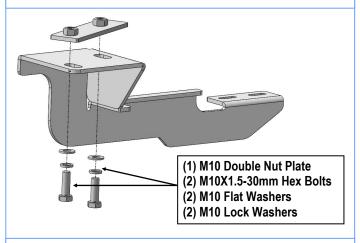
A) M10 Double Nut Plate Installation Driver Front Mounting Bracket (DFM) Location
